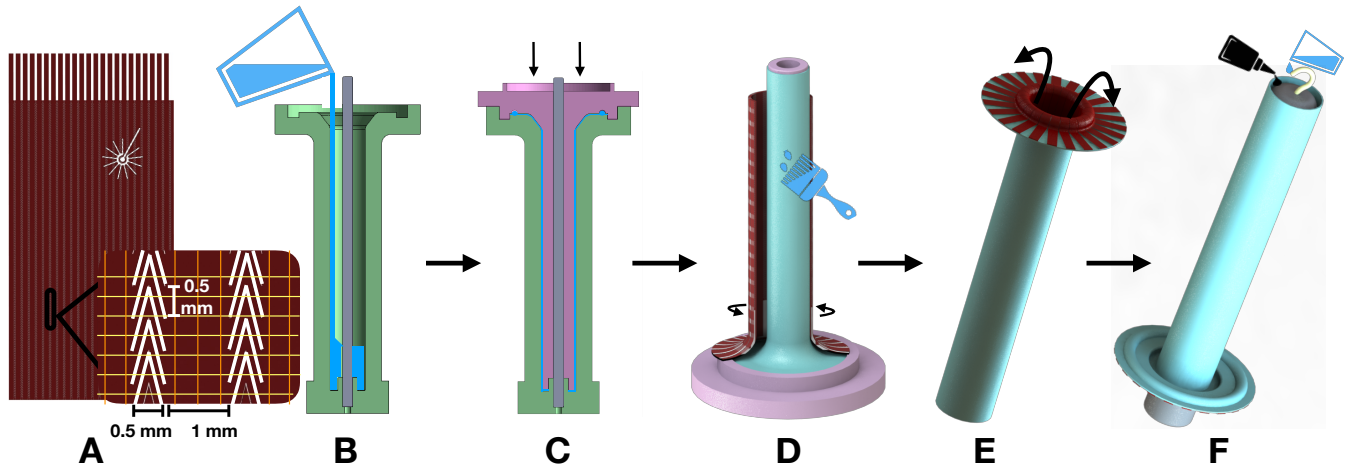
Fabrication process of long-stroke actuators: (A) Fine chevron pattern laser cut into Silnylon, forming anisotropic fabric (B) Silicone poured into 3D printed mold core (C) Mold assembled and silicone cured (D) de-molded silicone sleeve brushed with thin layer silicone to be tacky, and lasercut mesh adhered to sleeve (E) sleeve inverted so that silicone on exterior when convolution forms (F) fabric glued at the top to the piston and sealed with silicone
